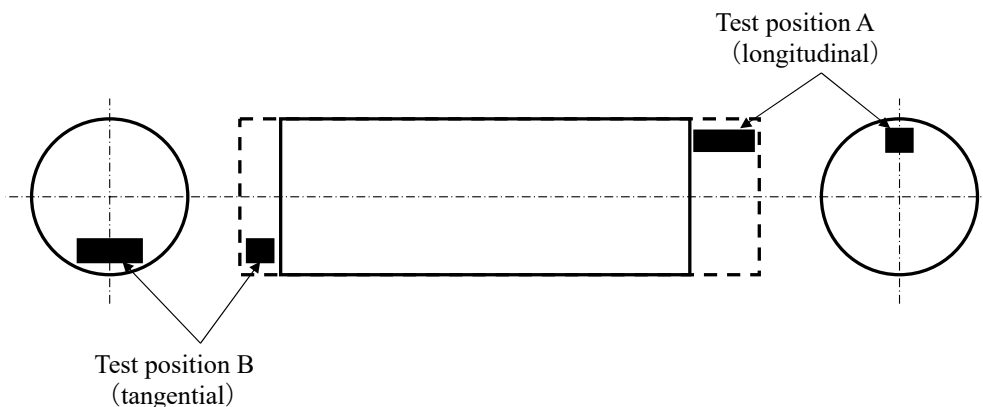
Alternative Directions or Positions for the Test Specimens for Flanged Shafts
